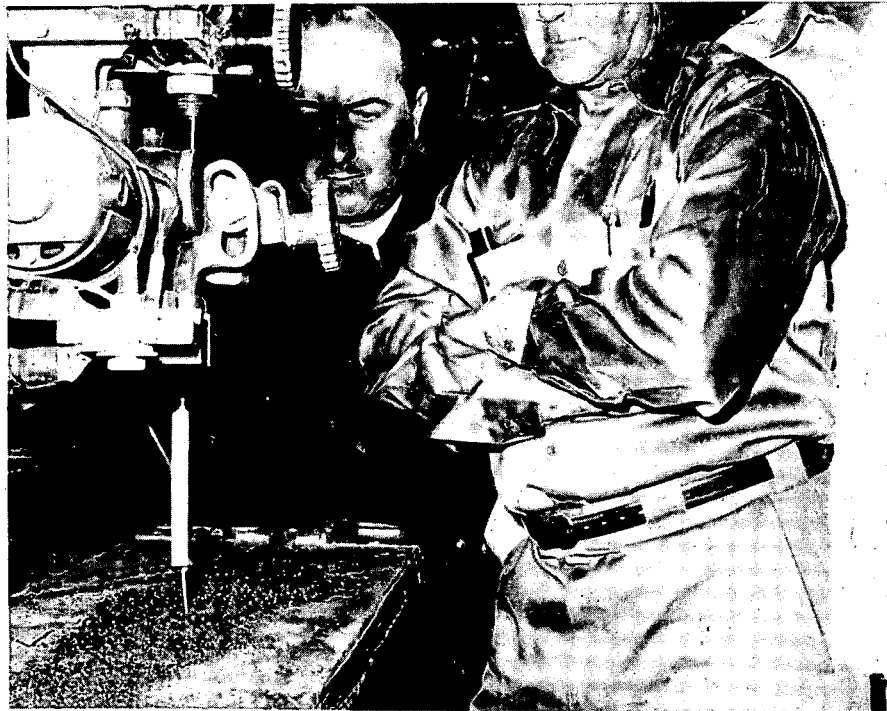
SUBMERGED ARC WELDING INSTRUCTION
